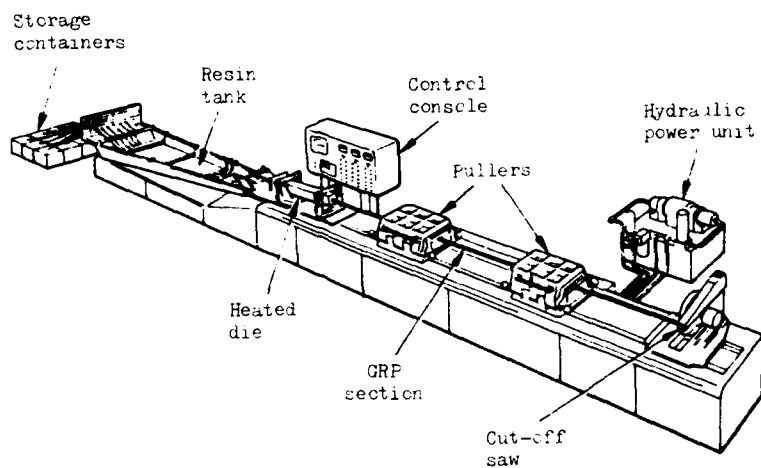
SCHEMATIC ILLUSTRATION OF A TYPICAL PULTRUSION MACHINE
